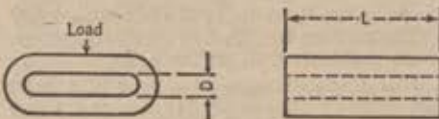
Deformed Specimen of Vacuum Brake Hose.
